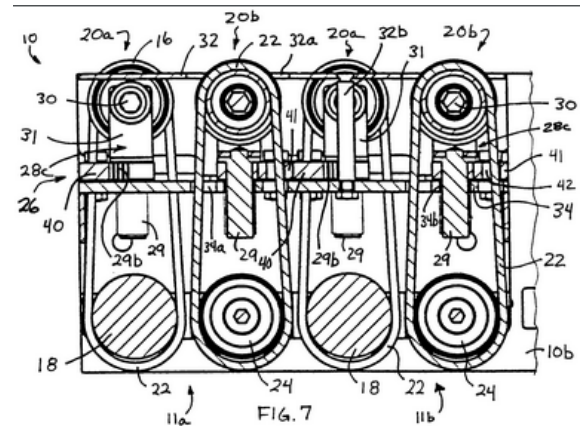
Drive transmission between the roller and wheels using o-rings [10].
